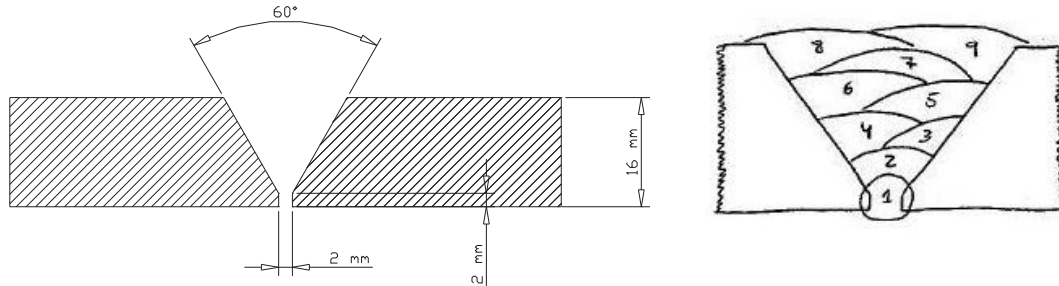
Weld preparation and welding sequence for the X100 FCAW butt joints
